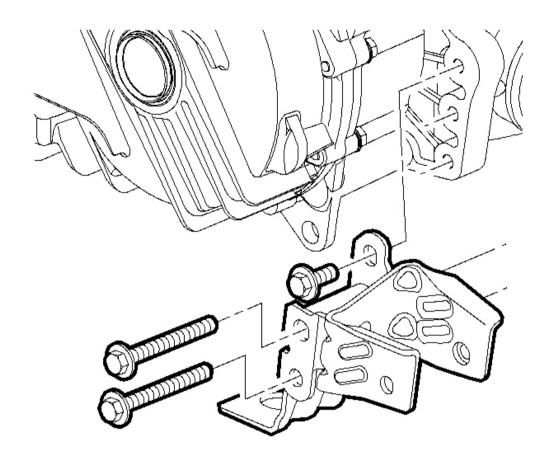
Rear Transmission Bracket, Power Takeoff & Bolts Courtesy of GENERAL MOTORS CORP.
